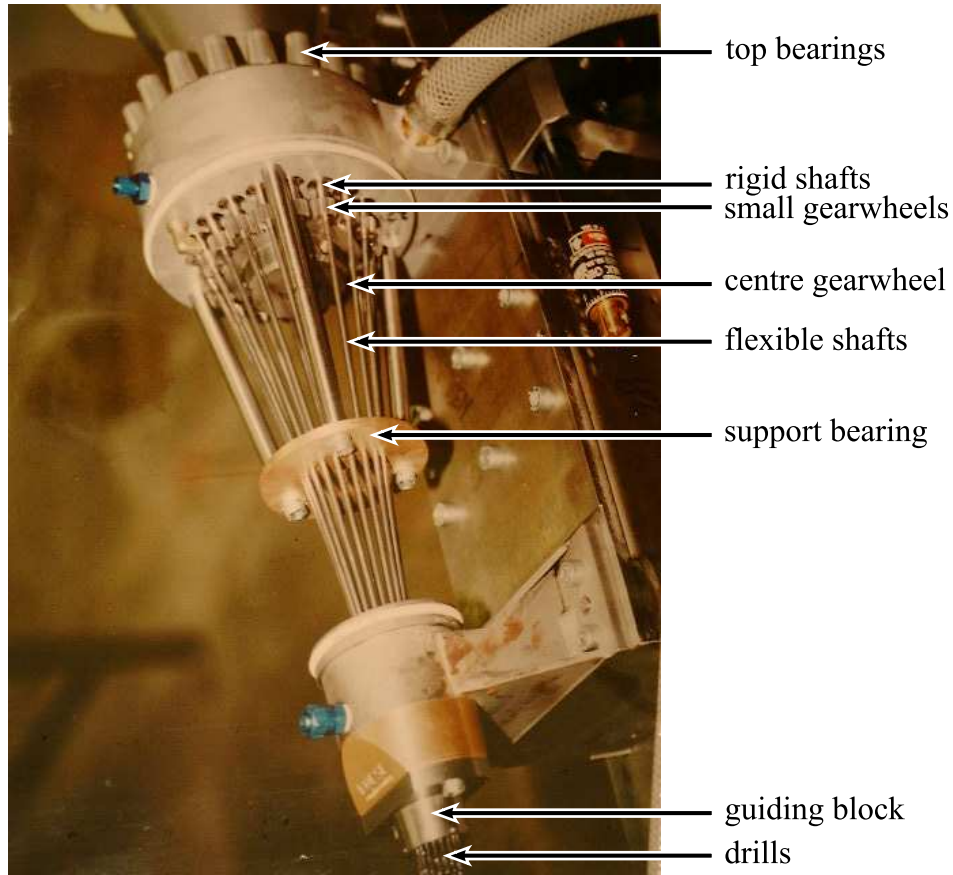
A Koese drill head with 18 shafts and one support bearing.
